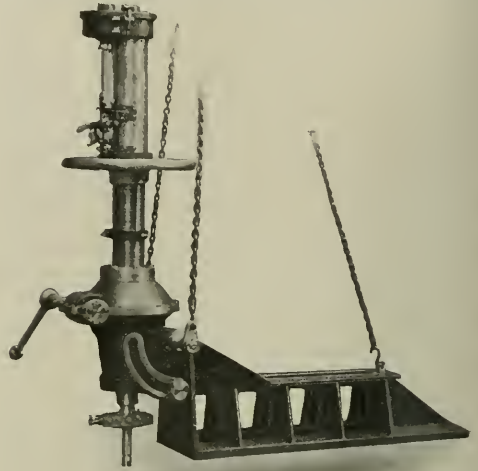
Capitaine large size Portable Milling and Drilling Tool.
